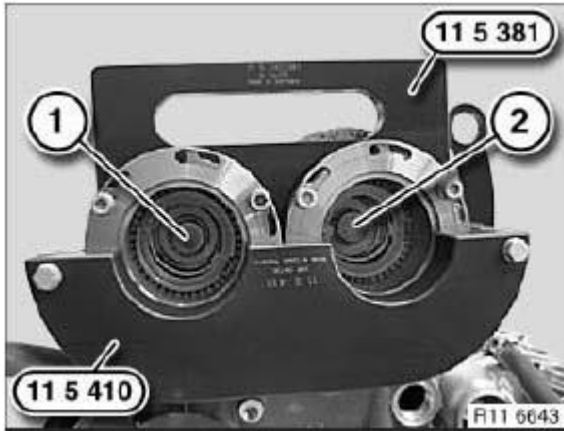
Identifying Exhaust VANOS Gear And Special Tool 11 5 381 (2 Of 2)
